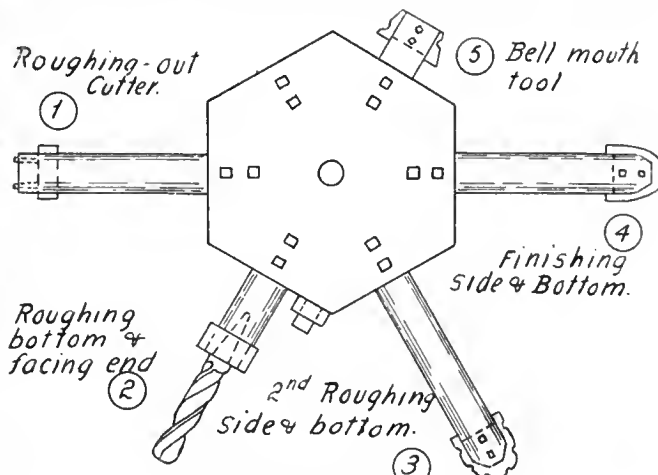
TOOLING DIAGRAM FOR INSIDE BORING ON 24-IN. ENGINE LATHE.
